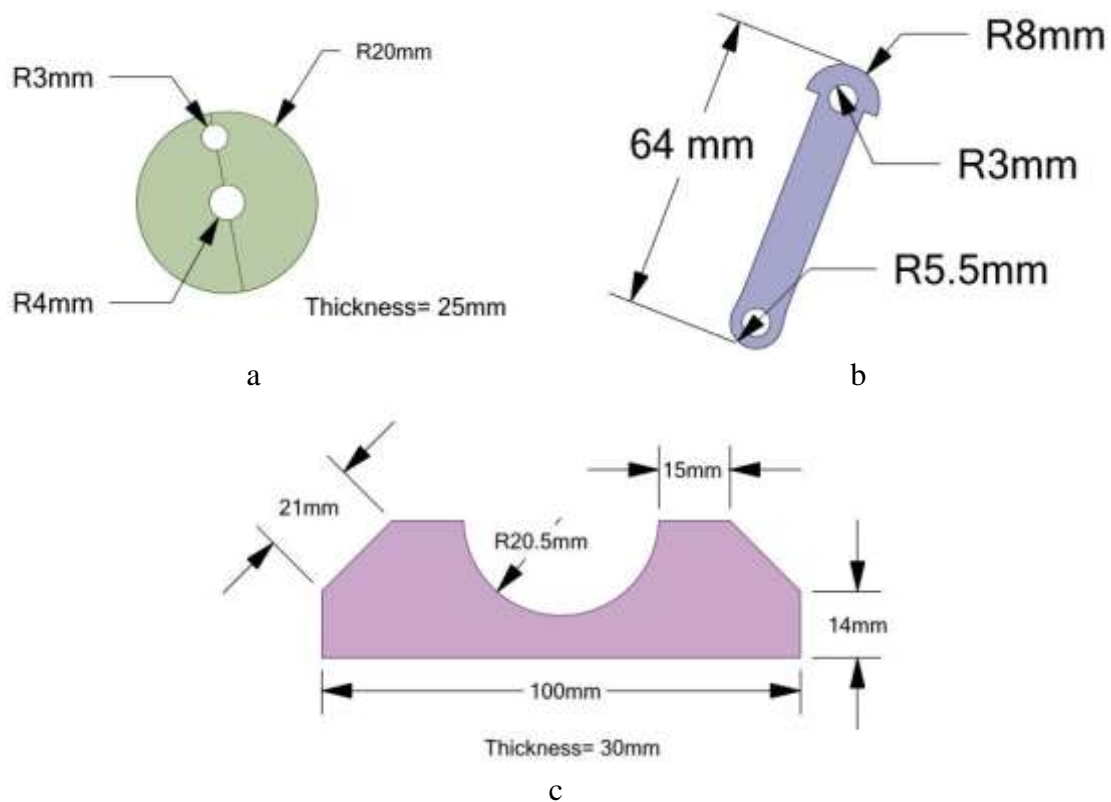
design details of the crank parts: a) Disk, b) Handle, c) Bearer
